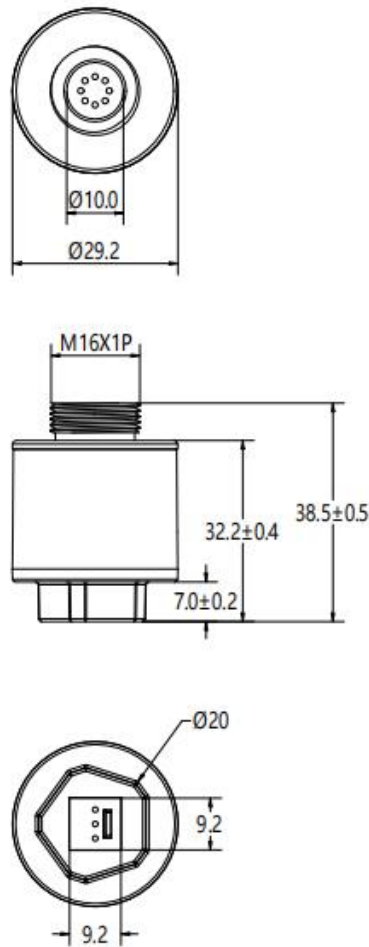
AO-02 outline dimensions (unit: mm, other unmarked tolerances:  $\pm 0.2$  mm)
